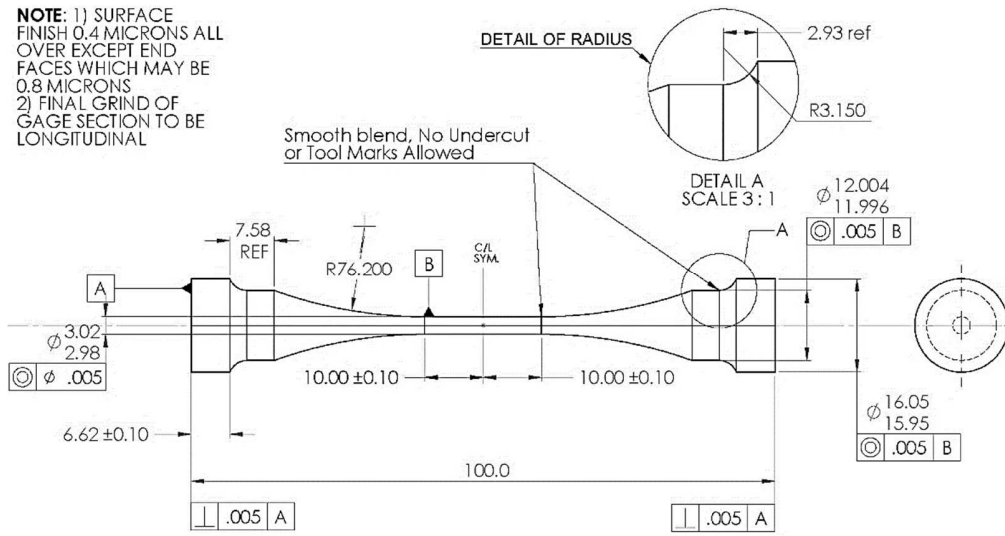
Technical drawing of the uniaxial tensile specimen (units: mm; scale 3:2).
